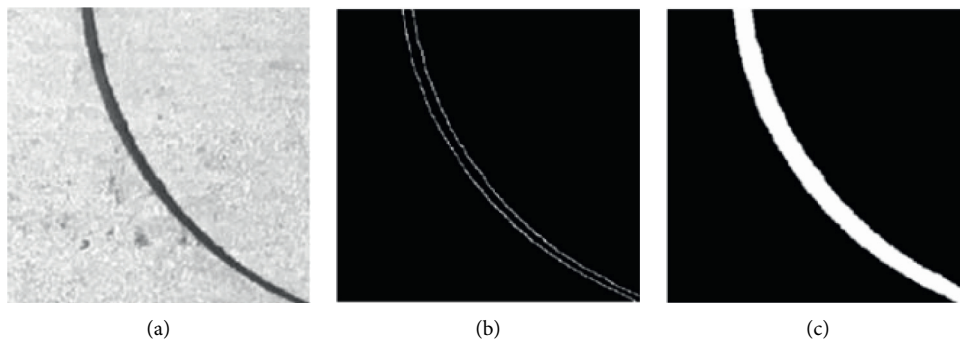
Irregular arc weld. (a) Original image of weld. (b) Image of weld edge. (c) Image of weld trajectory.
